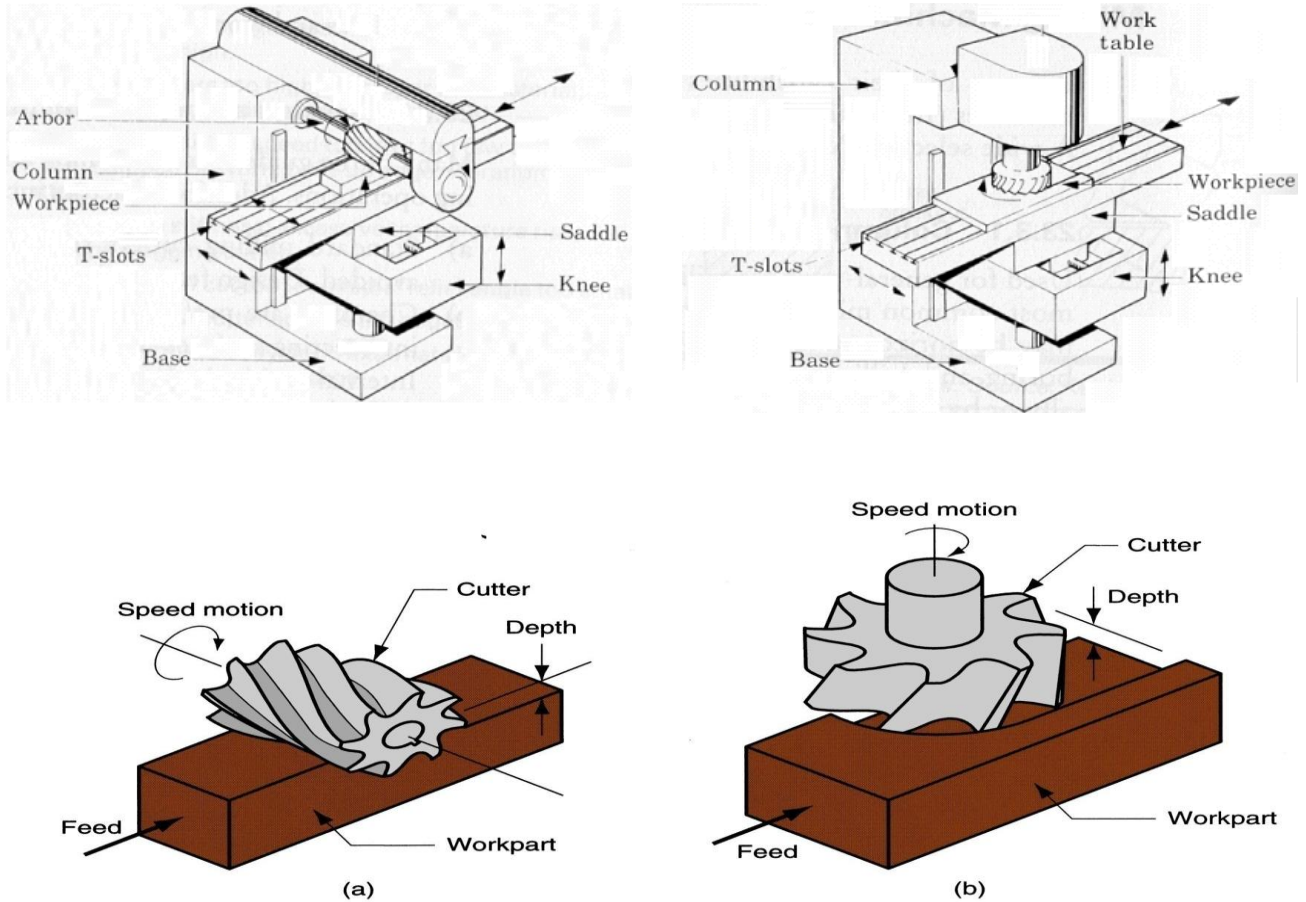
(a) peripheral milling on a horizontal mill (b) Face milling on a vertical mill
